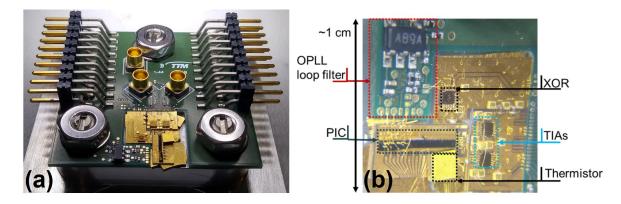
(a) The full PCB assembly for the OPLL testing is shown, and (b) the main components are labeled in a close view of the circuit.
